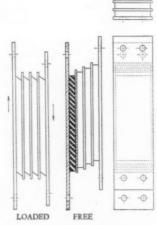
RUBBER SPRING DESIGNED FOR LARGE DEFLECTIONS IN THE SHEAR PLANE AND FOR MUCH SMALLER DEFLECTIONS AT RIGHT ANGLES THERETO
